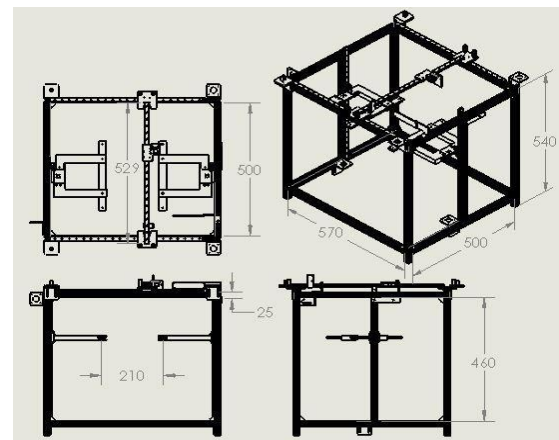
The 2D drawing of the chassis (dimensions are in mm).
